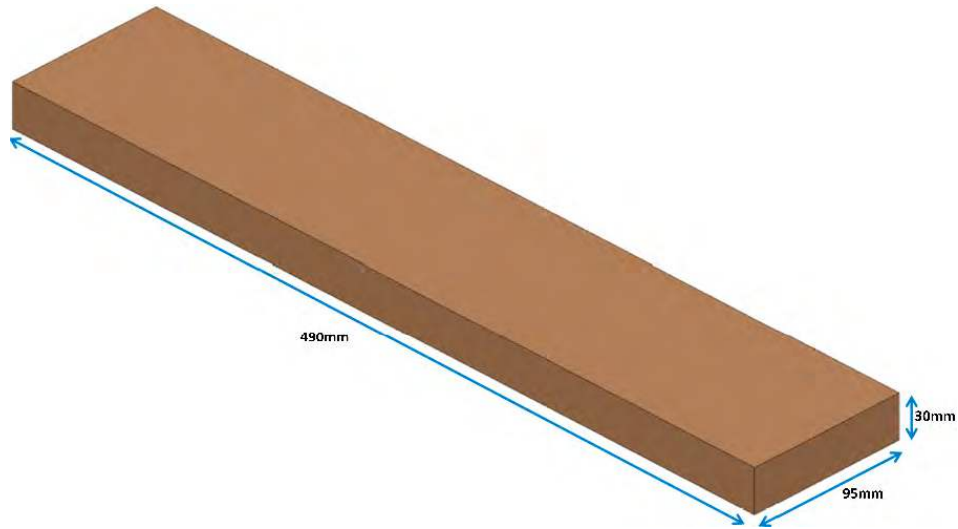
Dimensions for inner box packaging for LUXEON CoB Core Pro.
